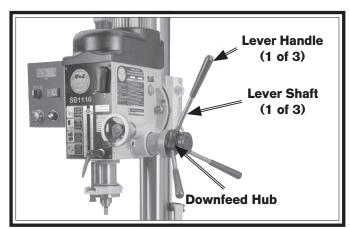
Coarse downfeed lever shafts and handles installed (SB1116 shown).
